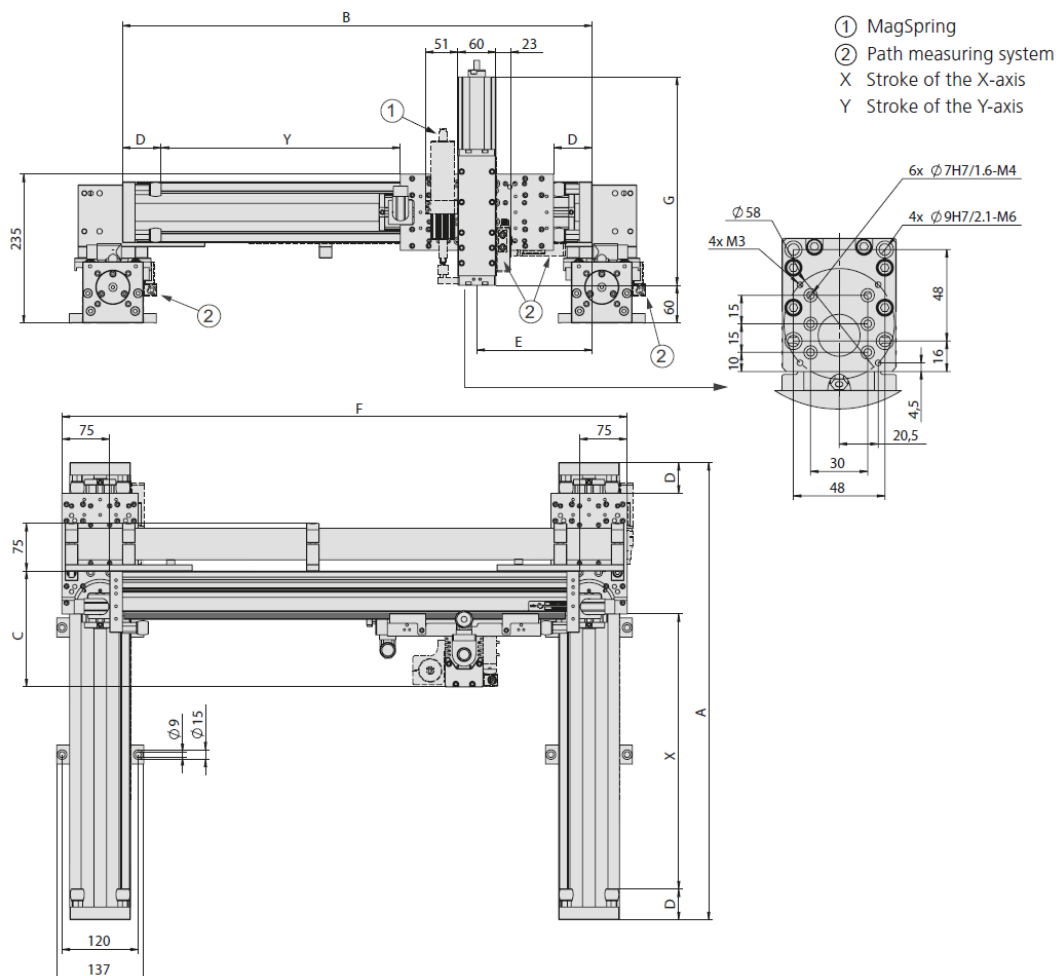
Dimensioned drawing EPS maxi gantry XXYZ
